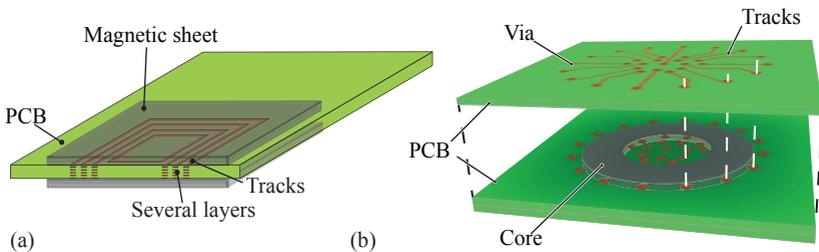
Basic principles to realize a PCB-integrated inductor: (a) PCB-track windings on several layers which are covered with magnetic sheets on top and bottom. (b) PCB-integrated core and the windings are realized as tracks and vias.
